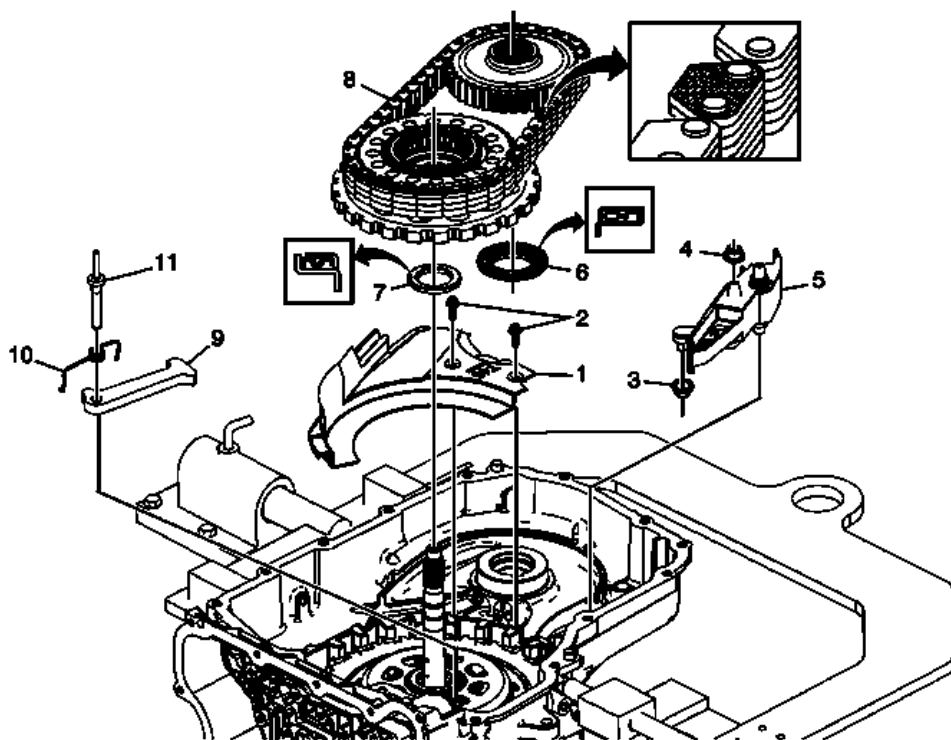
View Of Drive Sprocket, Driven Sprocket & Park Pawl
